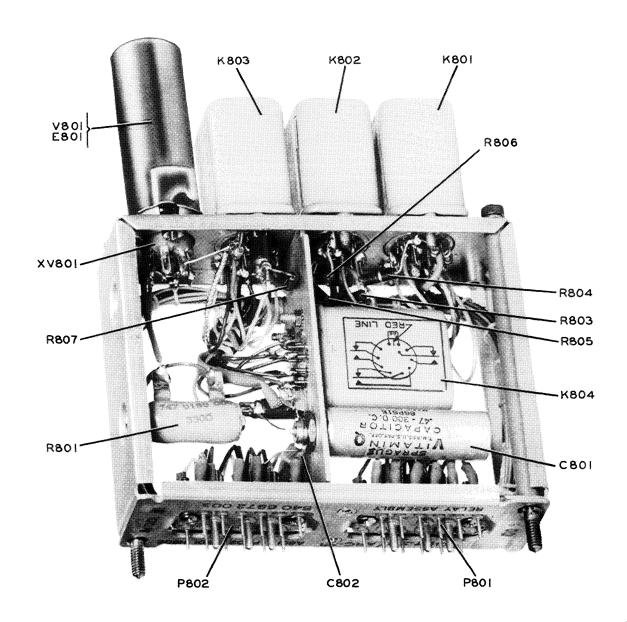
Transceiver 618S-1, Relay Assembly, Rear View
